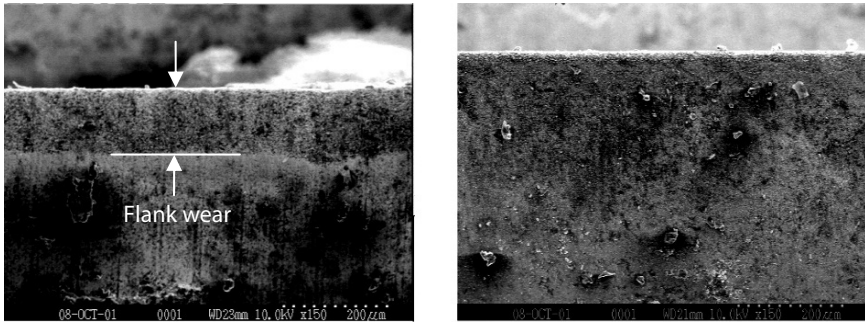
SEM pictures showing flank wear on uncoated cemented carbide tool (*left*) and diamond coated tool (*right*) after cutting the same distance of medium density fiberboard
